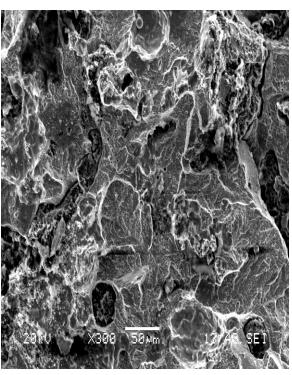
Fracture surface of Specimen, Tempered at 200°C, held 2hr.
